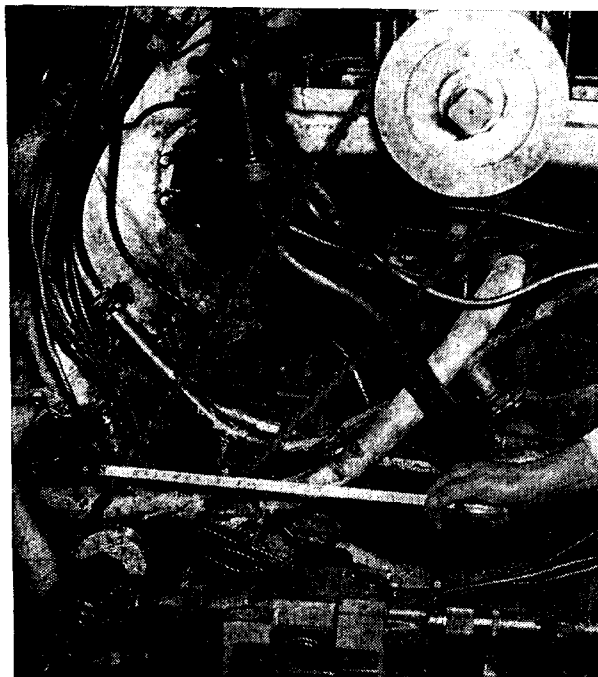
ROTOR DRIVING ARRANGEMENTS—
